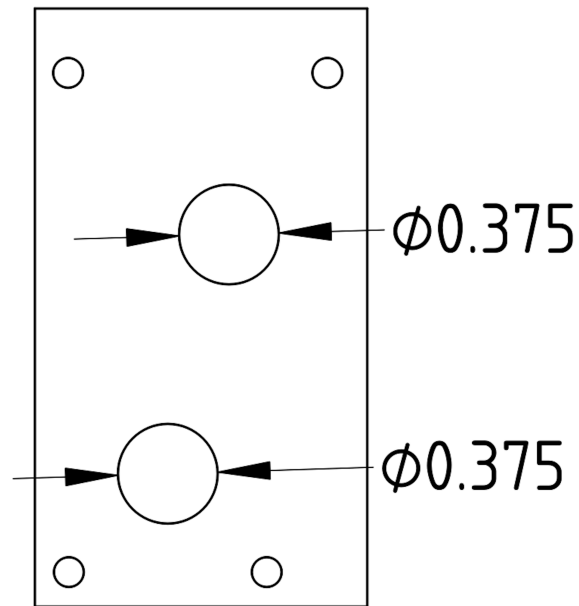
Engineering drawing of upper 6061 aluminum guide. Omitted dimensions are shared with Figure B.1. Units are in inches.
